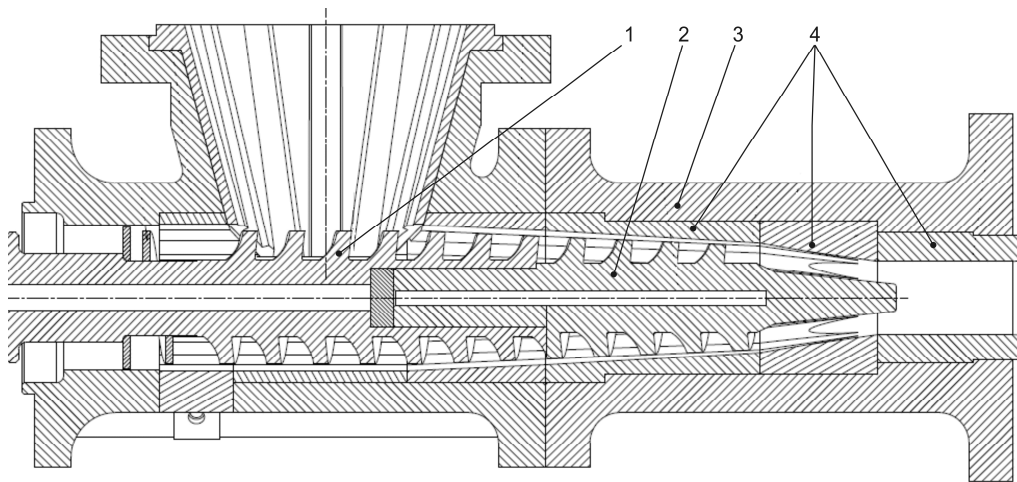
Pressing chamber with tools (1-feeding screw, 2-pressing screw, 3-pressing chamber, 4-nozzles)
